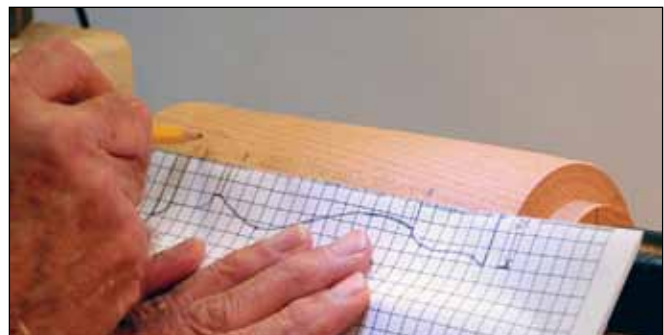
shows the marked blank. Use the parting tool to cut the component sections to the maximum diameter for each section. Start at the cup. The largest diameter is 1-1/2", and it is 1-1/2" long to the fillet. From the fillet by the cup to the fillet at the end of the bulb the maximum diameter is 1-3/4". The base just below the bulb is 1-1/2" diameter, and 2-1/2" to 3" is the maximum diameter of the base.
